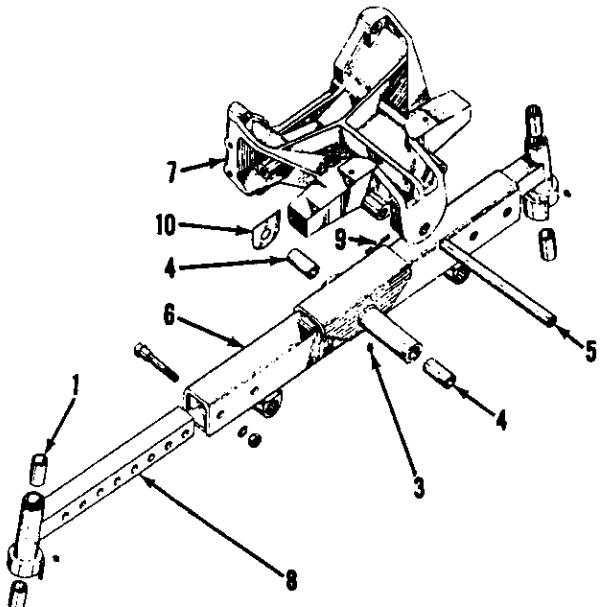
Exploded view of Series B-414, 354, 364 and 384 adjustable front axle and component parts.
